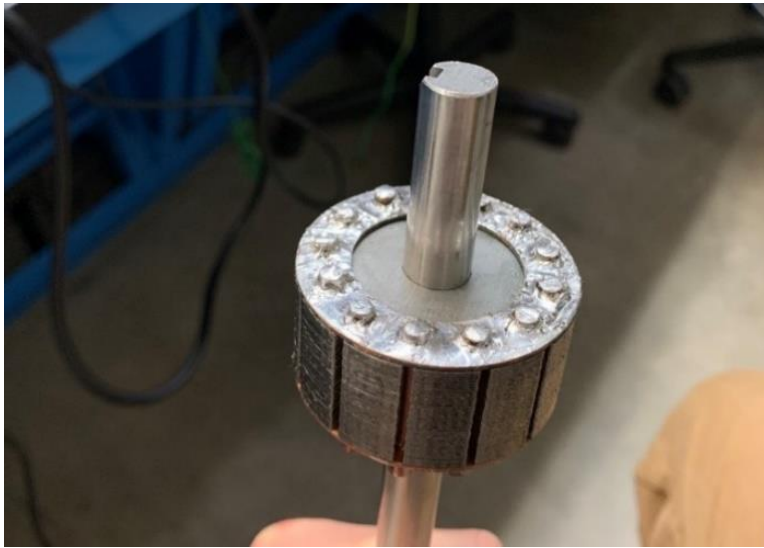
Rotor Squirrel-cage endplate soldered to rotor bars.
